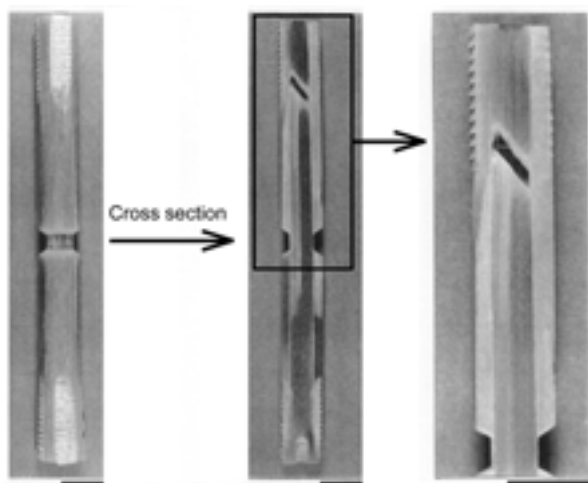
Macroscopic observation of fractured tensile specimen before immersion.
